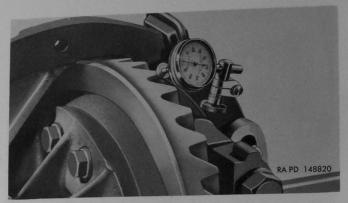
Checking drive gear and drive pinion backlash with dial indicator 41-1-100.
